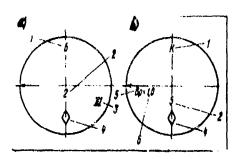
Piston marking: a) nominal dimension b) overhaul dimension 1) dimensional group according to skirt diameter 2) dimensional group according to weight 3) dimensional group according to wrist pin hole diameter 4) location of DTC stamp 5) designation of piston overhaul group 6) overhaul dimension of piston
